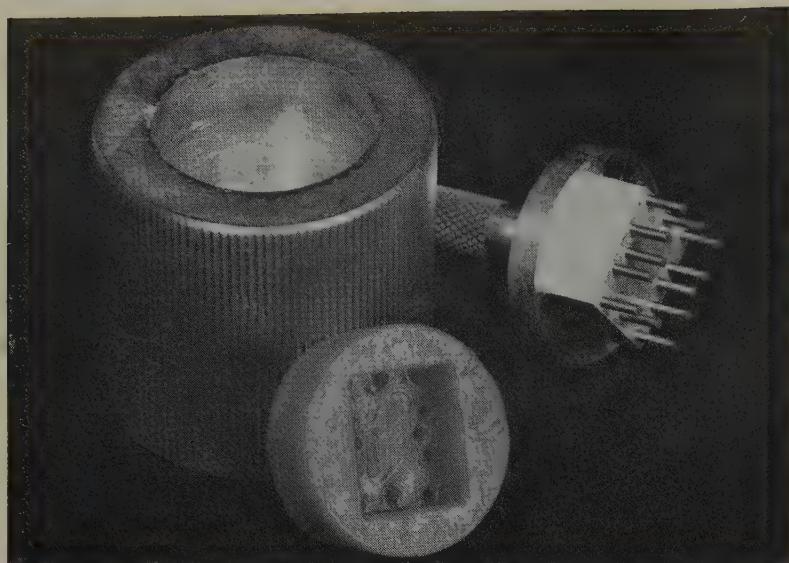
, this photograph shows the essential features of the master mold for forming paper-coating grade polyethylene into molds. Left to right, housing for mandrel; completed polyethylene mold; mandrel.
